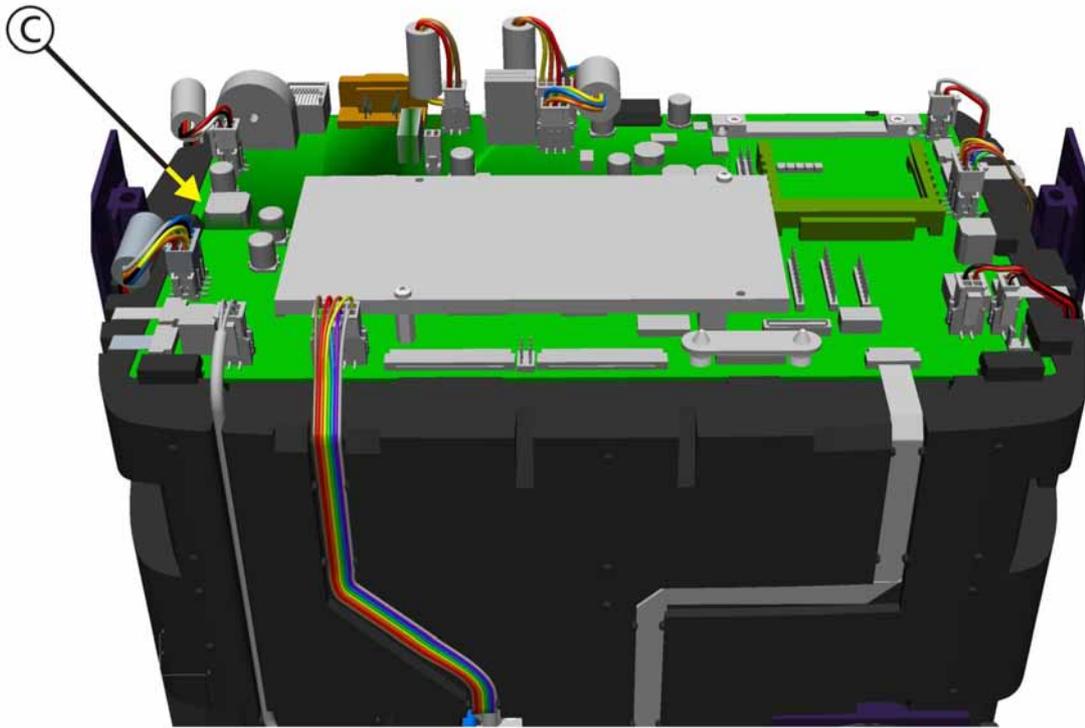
Top Foam Section and Mainboard Assembly (Front View), Step 2
